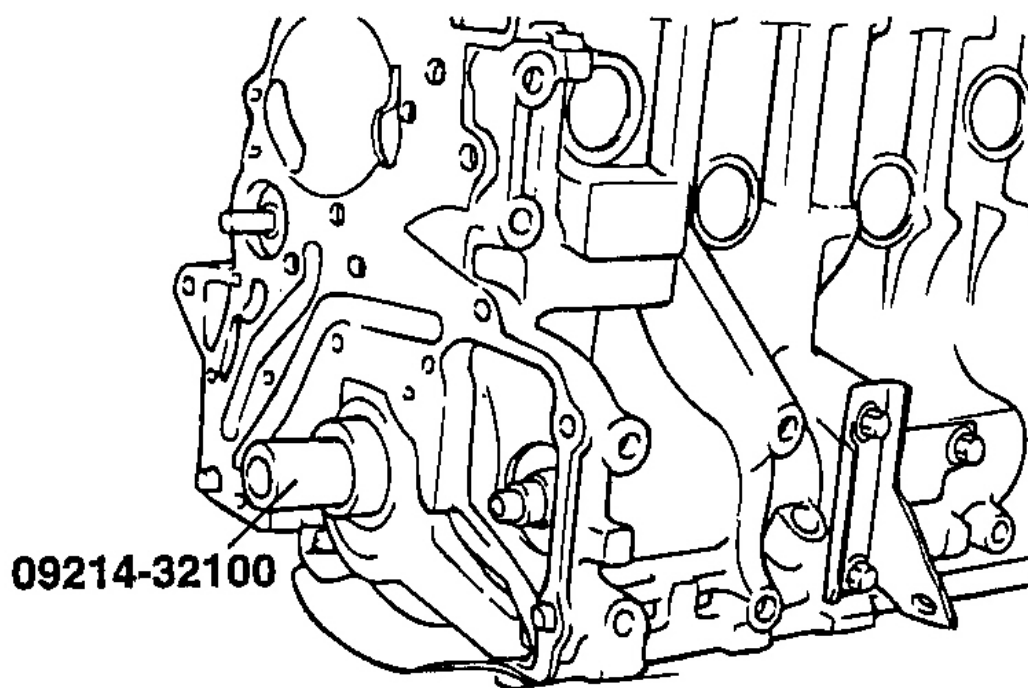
Identifying Crankshaft Front Oil Seal Installer (09214-32100)
